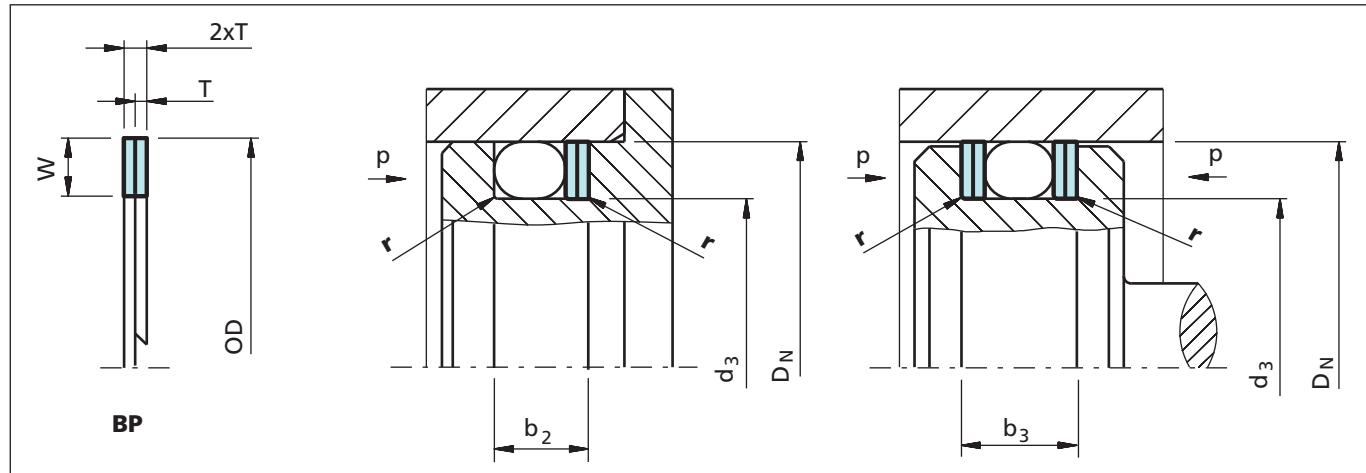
Installation drawing external sealing, spiral Back-up Ring type
